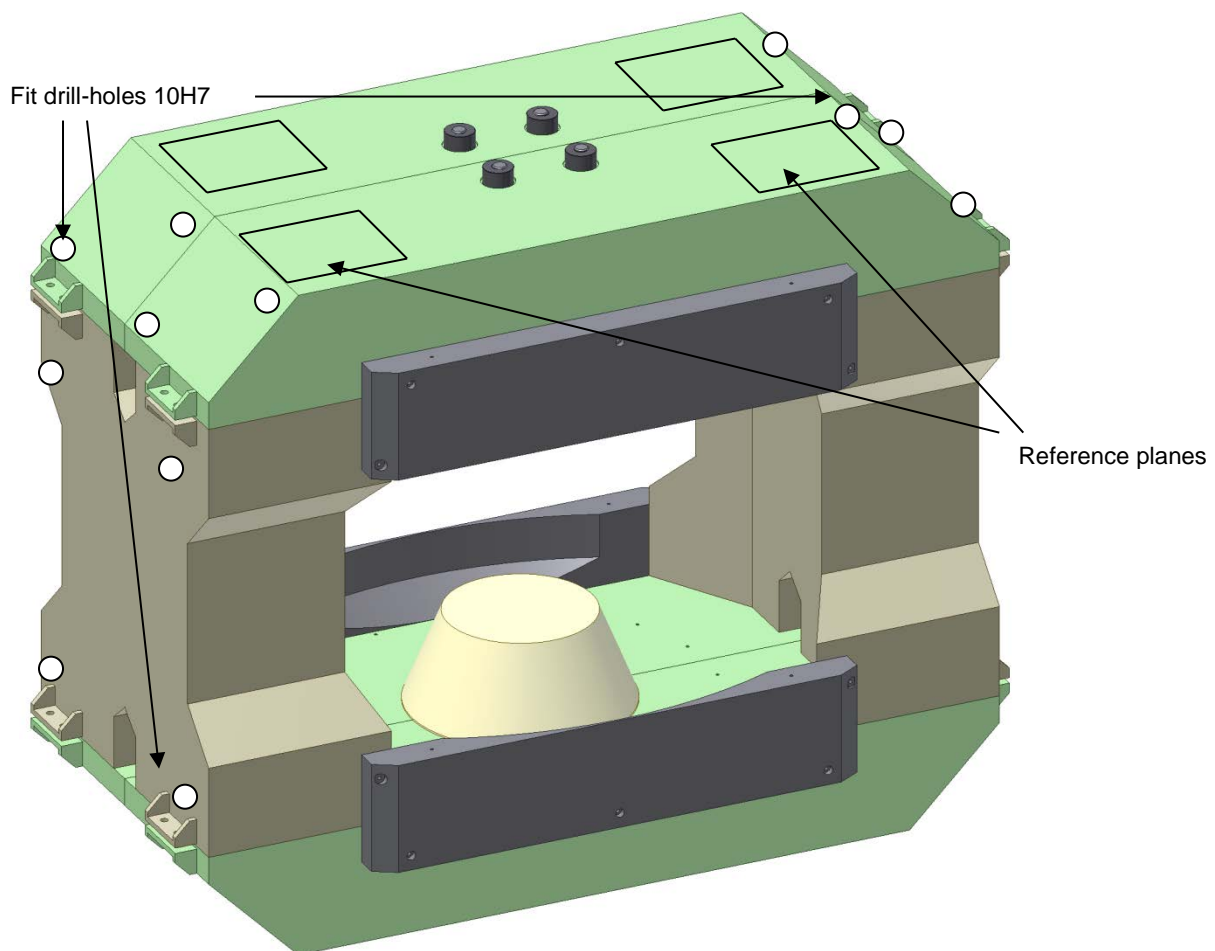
Schematic View of the CBM dipole with reference planes and drill holes
